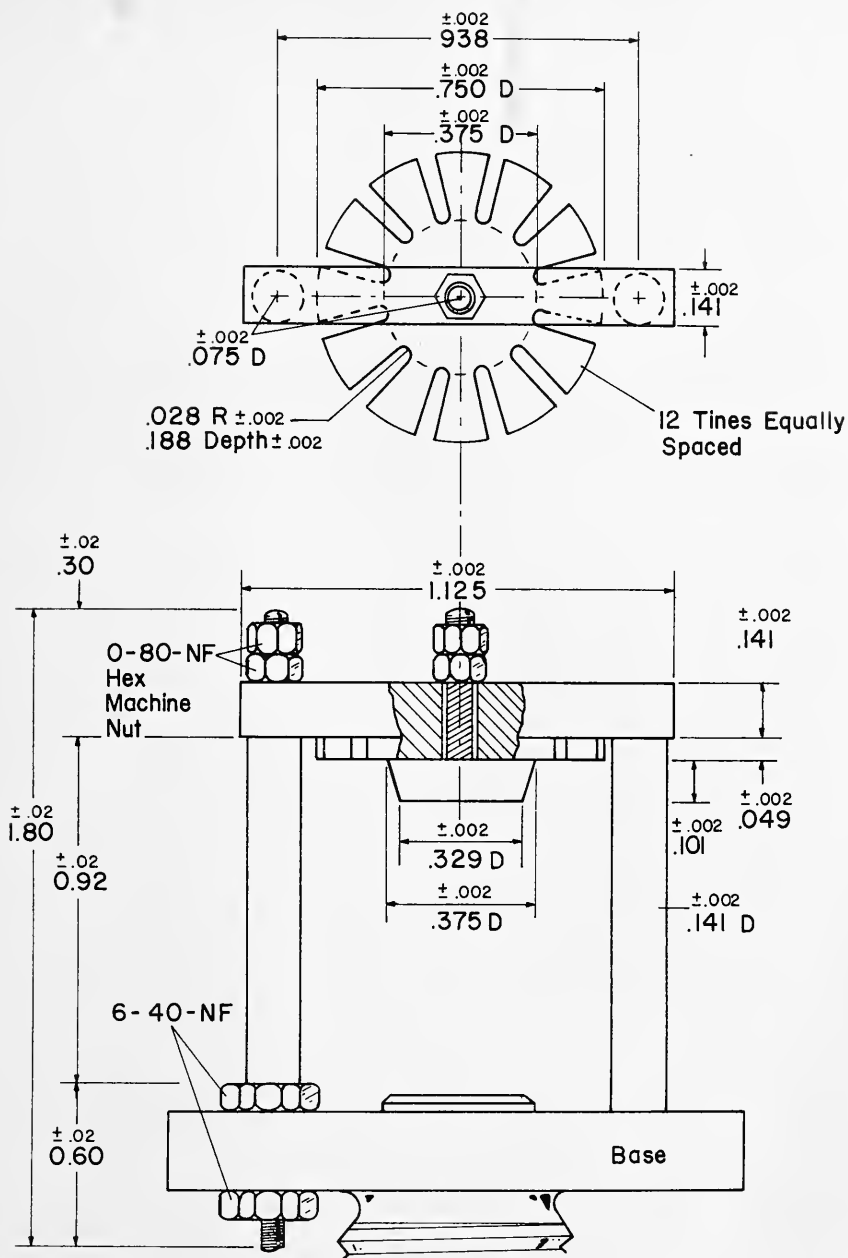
DETAILED DIMENSIONS OF THE 3/4-SCALE SPRINKLER.
